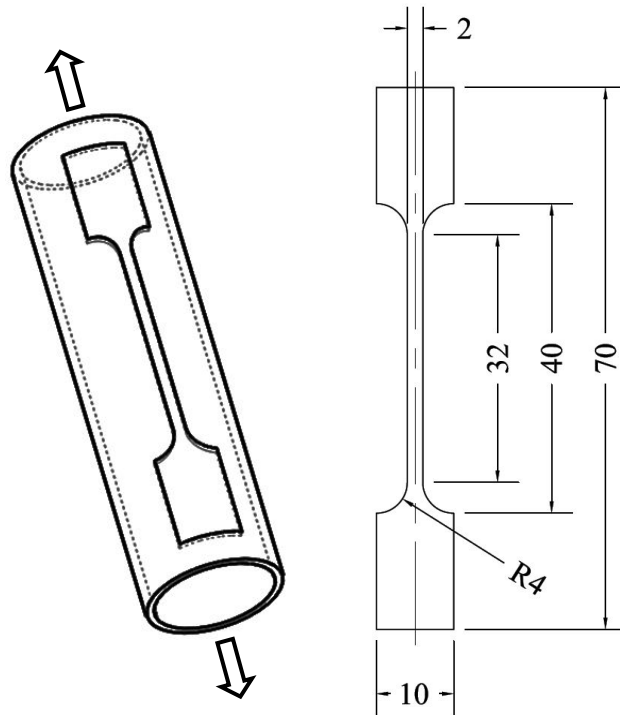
Dimensions of the tensile specimen cut along the longitudinal direction.
